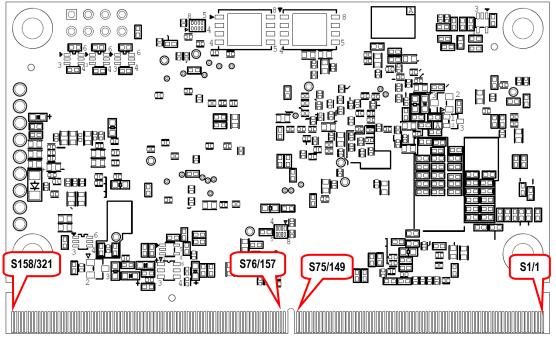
EACOM Board Pin Numbering, Secondary/Bottom Side
